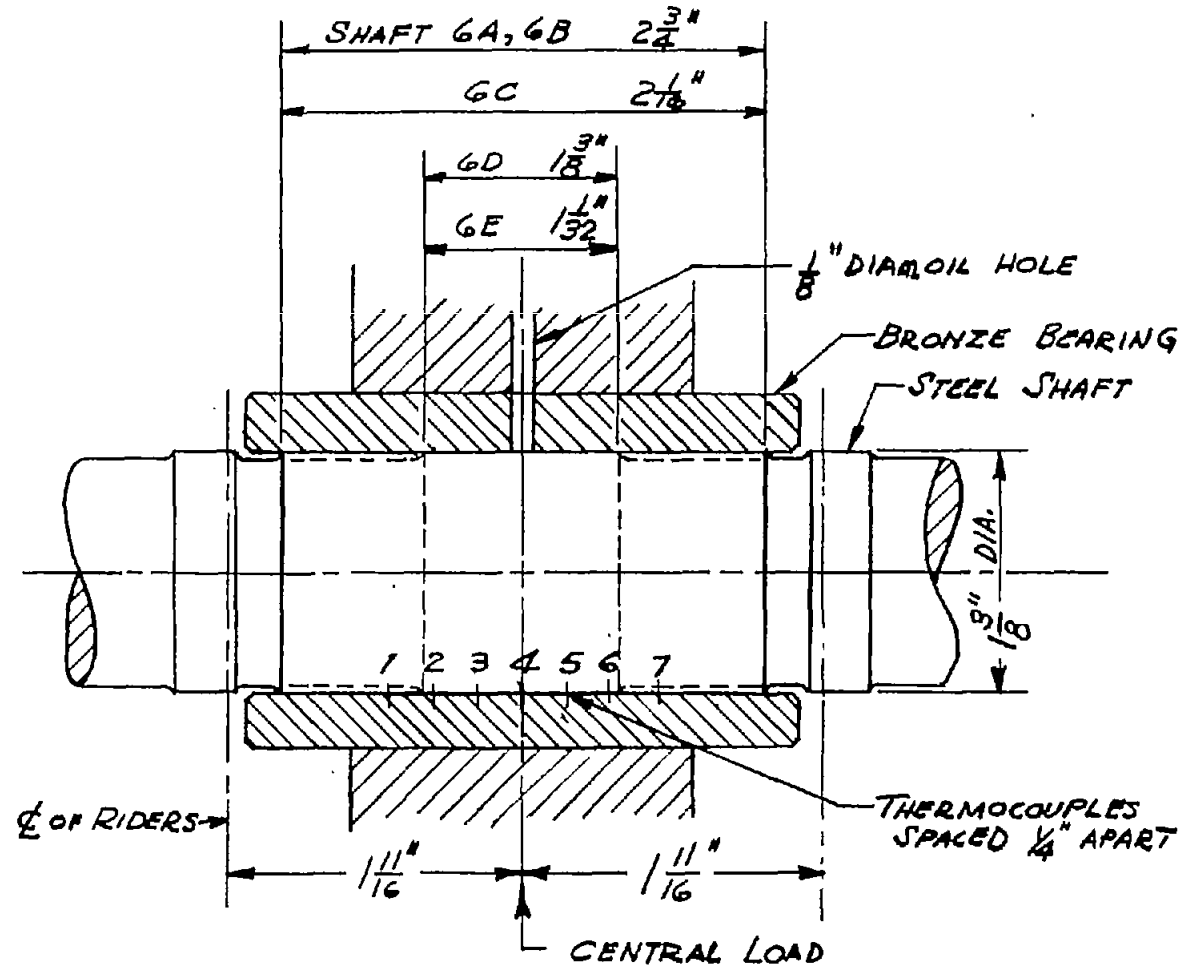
Configuration of test bearing and shaft showing location of oil hole, thermocouples, and displacement-measuring riders.
